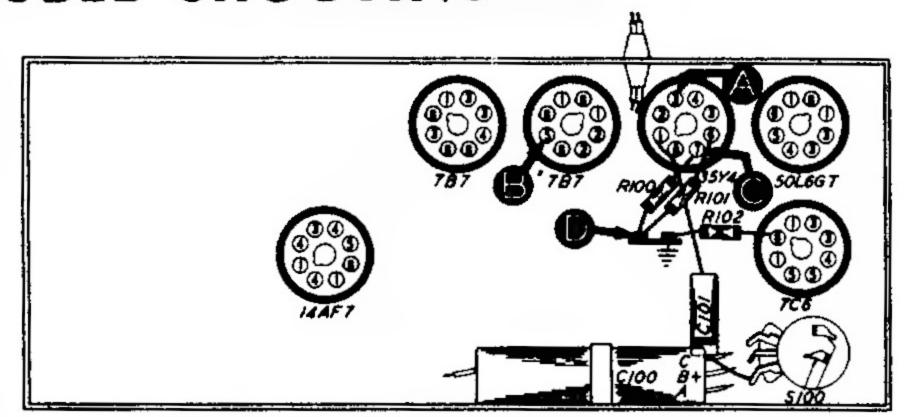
BOTTOM VIEW, SHOWING SECTION 1 TEST POINTS
